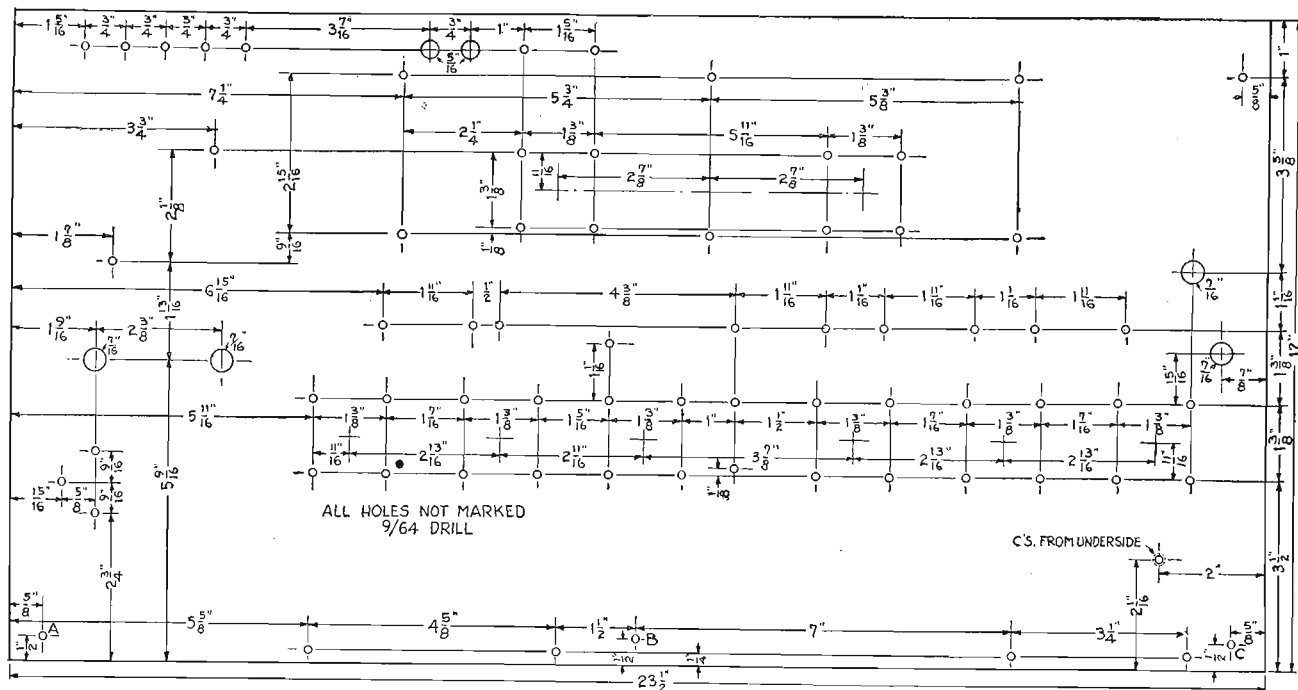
Front panel drilling DRAWING. "Seven holes are all that need be drilled"
